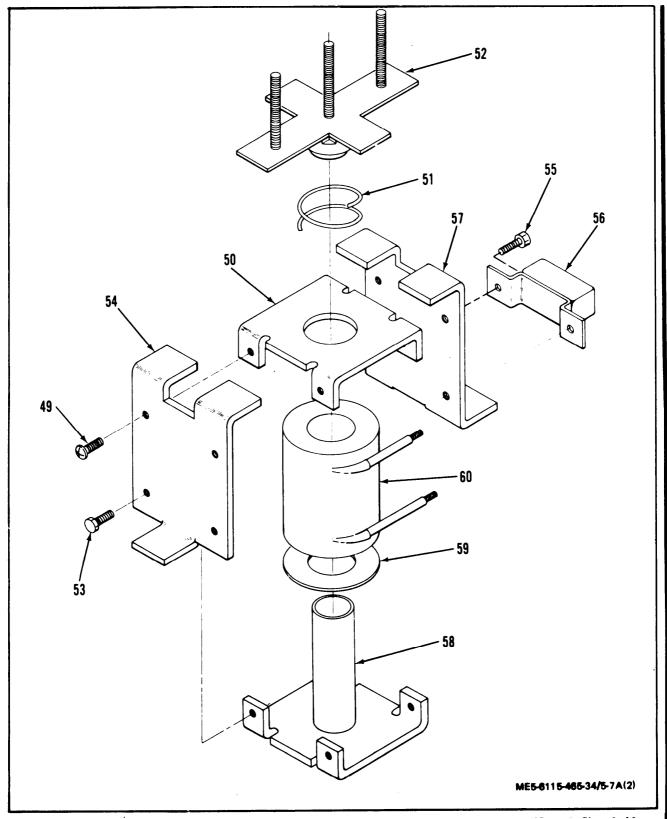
Main Load Contactor, Exploded View (Effective with Serial No. RZ70001 and KZ00001 thru KZ02752) (Sheet 2 of 3)
